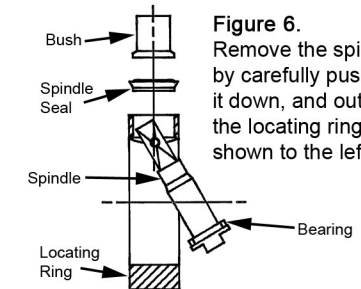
Remove the spindle by carefully pushing it down, and out of the locating ring as shown to the left.
